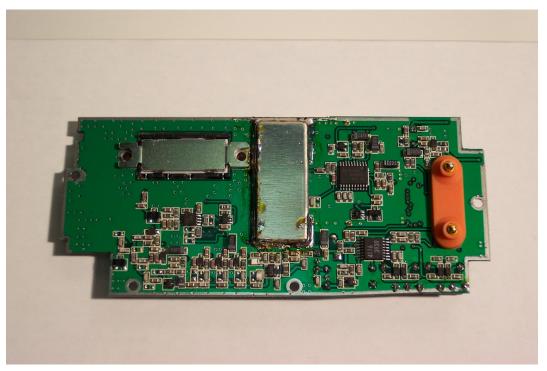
complete topside/bottomside RF PCB with shields removed
